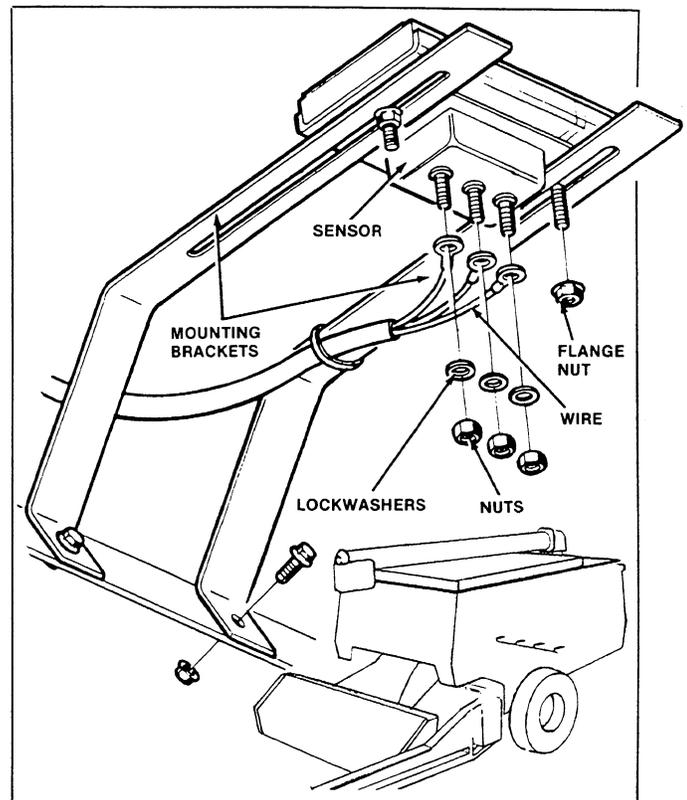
Grain Loss Sensor Pad Electrical Hook-up and Mounting
